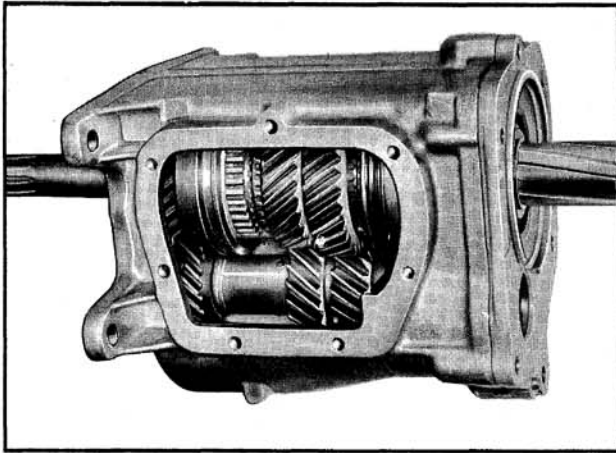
Third and Fourth Speed Synchronizer Clutch Sleeve in Fourth Gear Position
